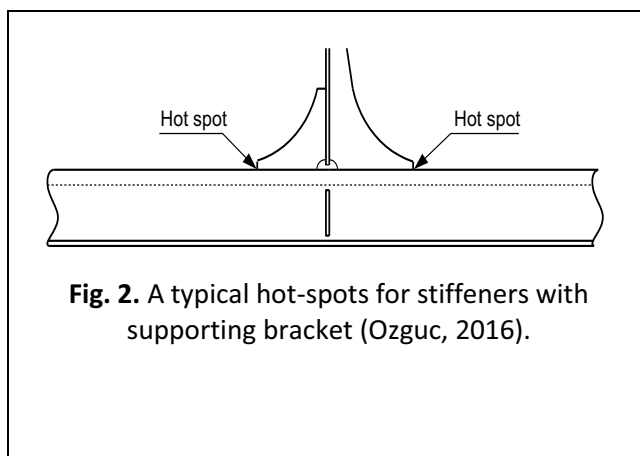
A typical hot-spots for stiffeners with supporting bracket (Ozguç, 2016).
